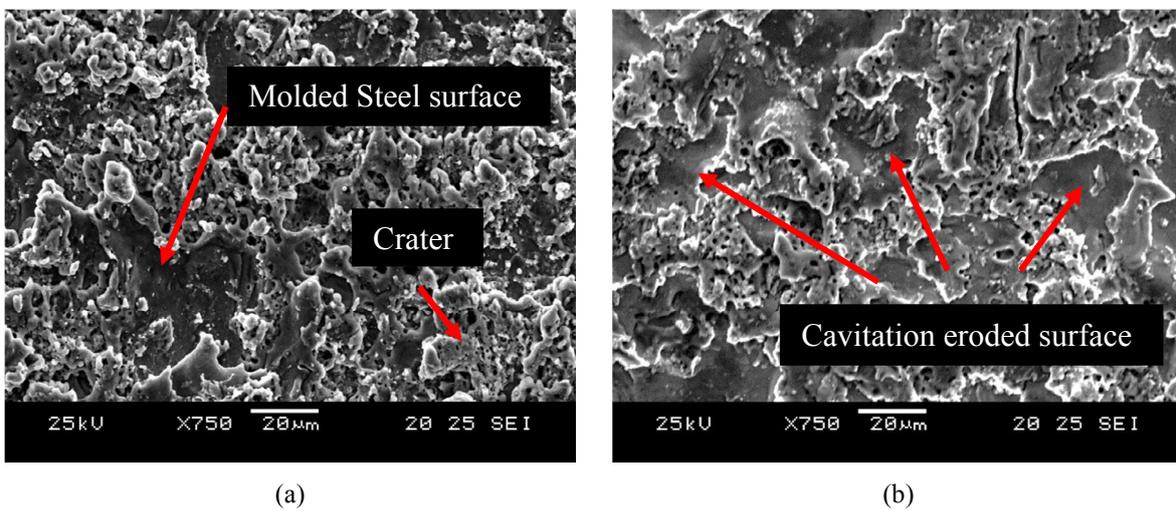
(a) EDM cut surface of SAE 304 stainless steel (b) surface after USM at P=300 kPa
